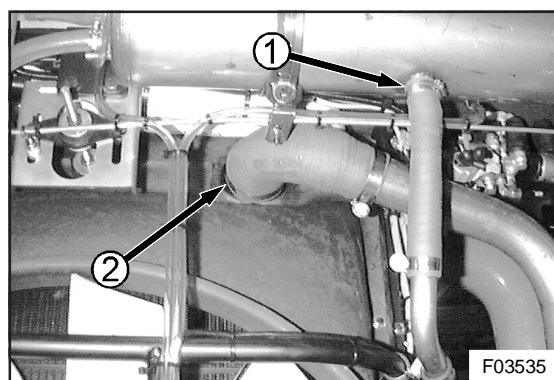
Upper hose clamps of surge tank filler tube (1) and radiator inlet tube (2)
